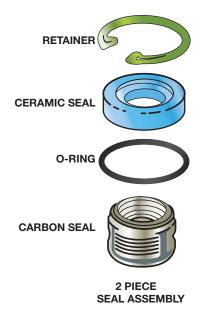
Many compressors use a two-piece seal with a rotating carbon seal and a stationary seal.
